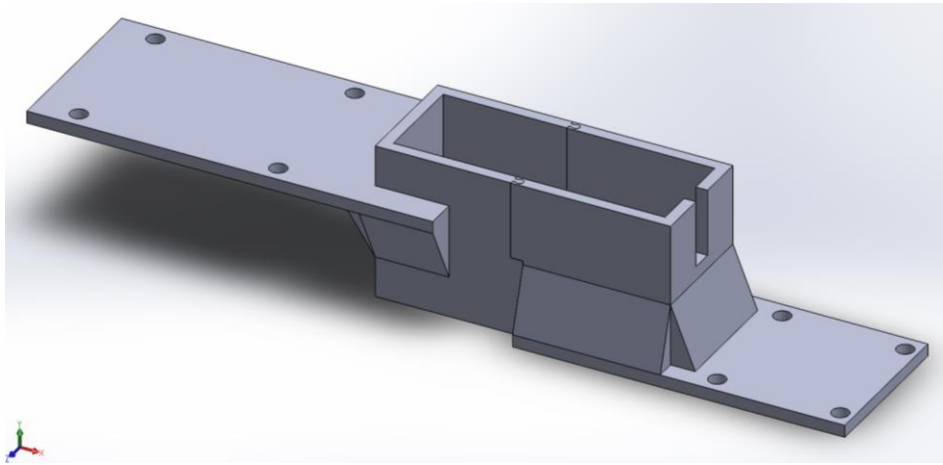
Solidworks model of the 3 inch x 3 inch 3D printed device holder for the Poly-chip system.
